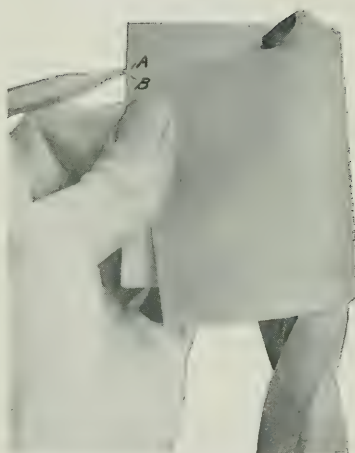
METHOD OF MEASURING THE CLEARANCE ANGLE
